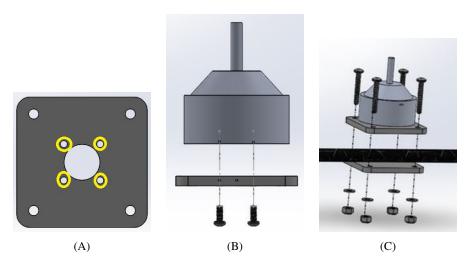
The base plate has four holes, (A), for screws that will attach the motor to its base, (B). Once they are attached the motor base can then be attached with screws to the mounts on the carbon fiber tube, (C).
